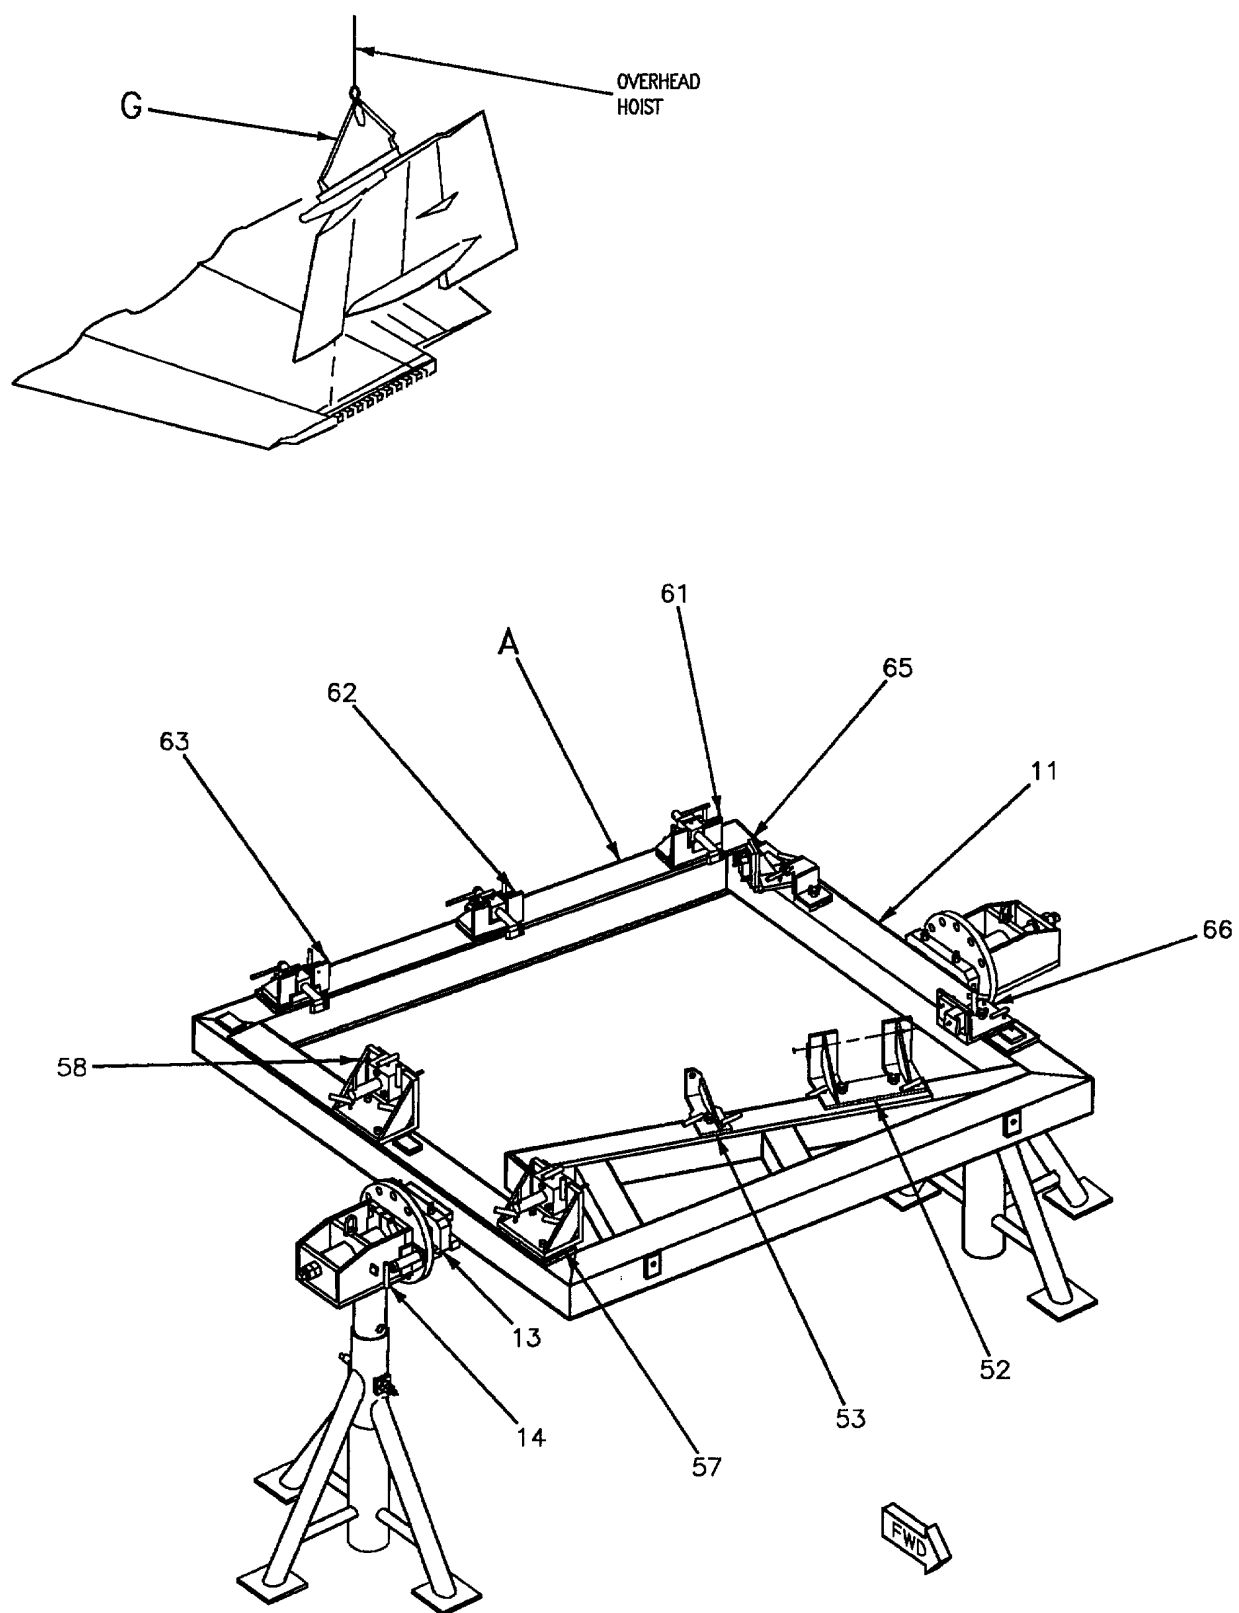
Installation of Outer Wing into Fixture (Sheet 1)
